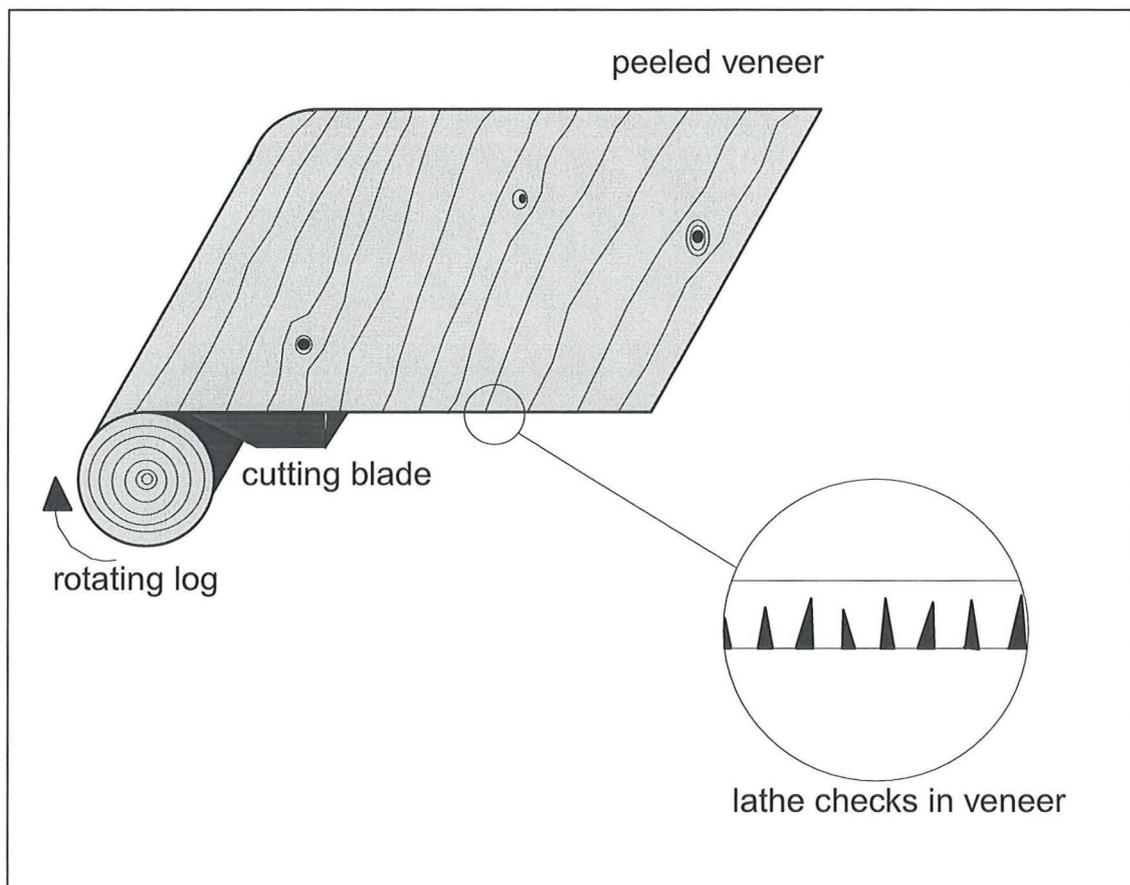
Lathe checks appear on the face due to rotary peeling.
